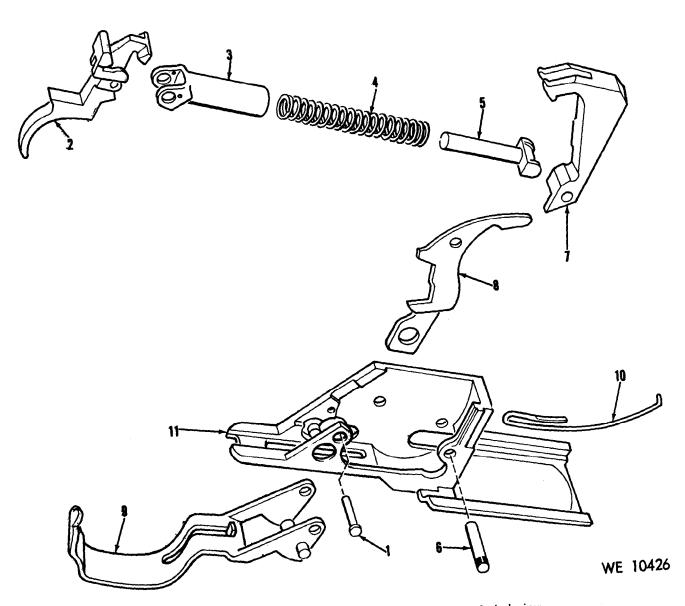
Trigger housing assembly 6528297 - exploded view.
